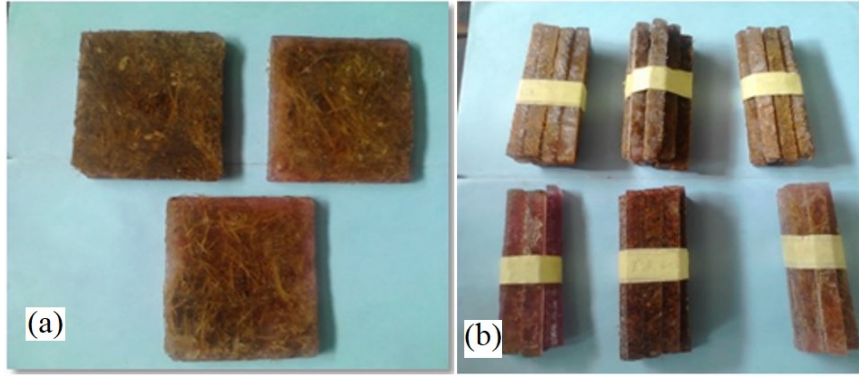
Short fibers ready for the production of the composite material. (a) Shape of the plates after demolding; (b) Shape of the specimens after machining.
